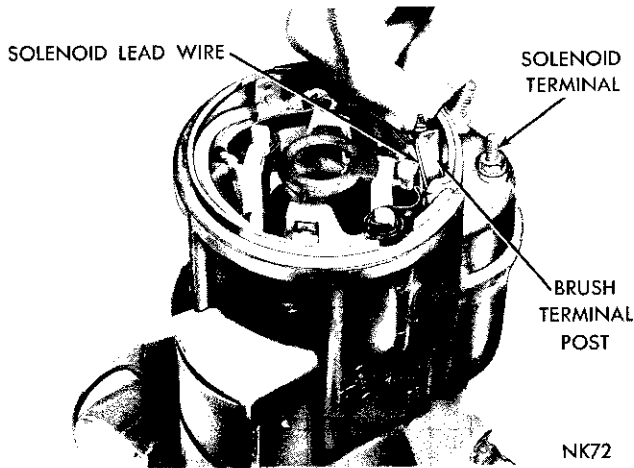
Unwinding or winding the Solenoid Lead Wire
